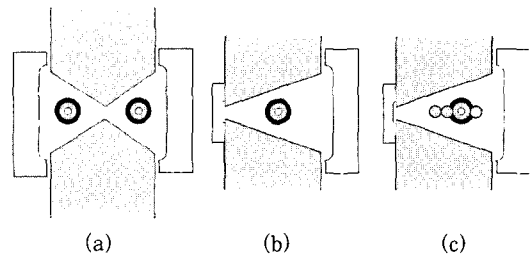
Variable techniques for consumable guide method ESW. (a) Tandem technique with two consumable guides/electrodes for double V-groove (b) Single electrode method (c) Single electrode wing attached consumable guide method
